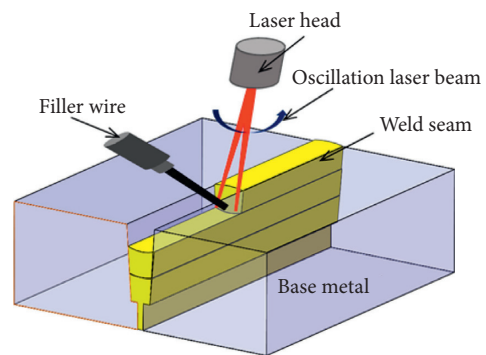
Schematic diagram of welding experimental equipment.
